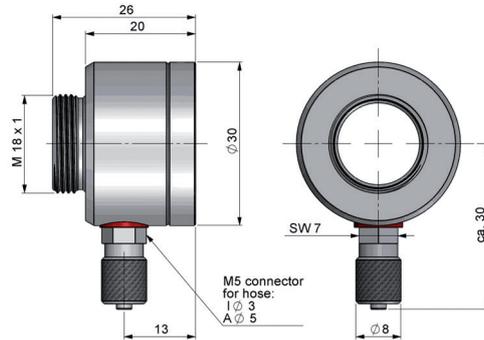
Air purge collar for massive housing (thread M18x1) [TM-APMH-CT]
